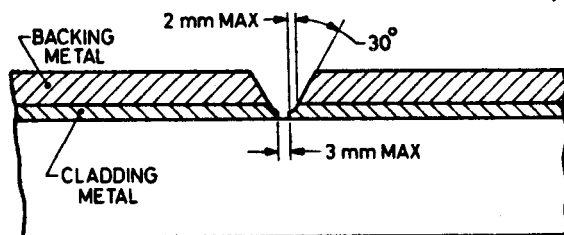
METHOD OF EDGE PREPARATION FOR WELDING CLAD STEEL
